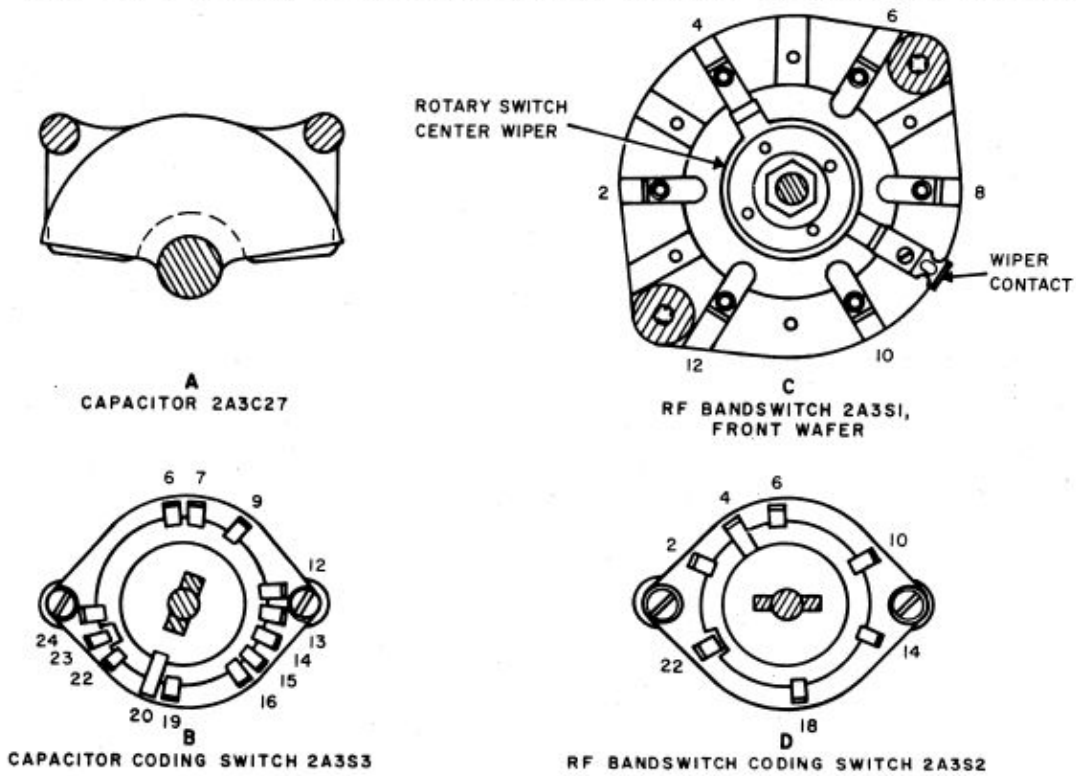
ANTENNA COUPLER ASSEMBLY 2A3, SWITCH ASSEMBLY DETAIL
